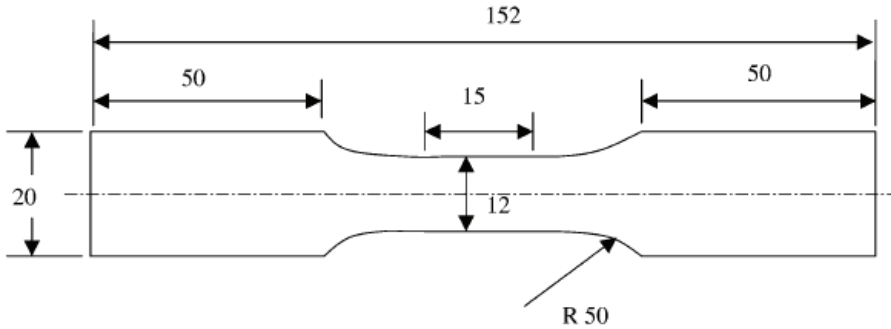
A drawing of the sample geometry for the uniaxial tension test.
